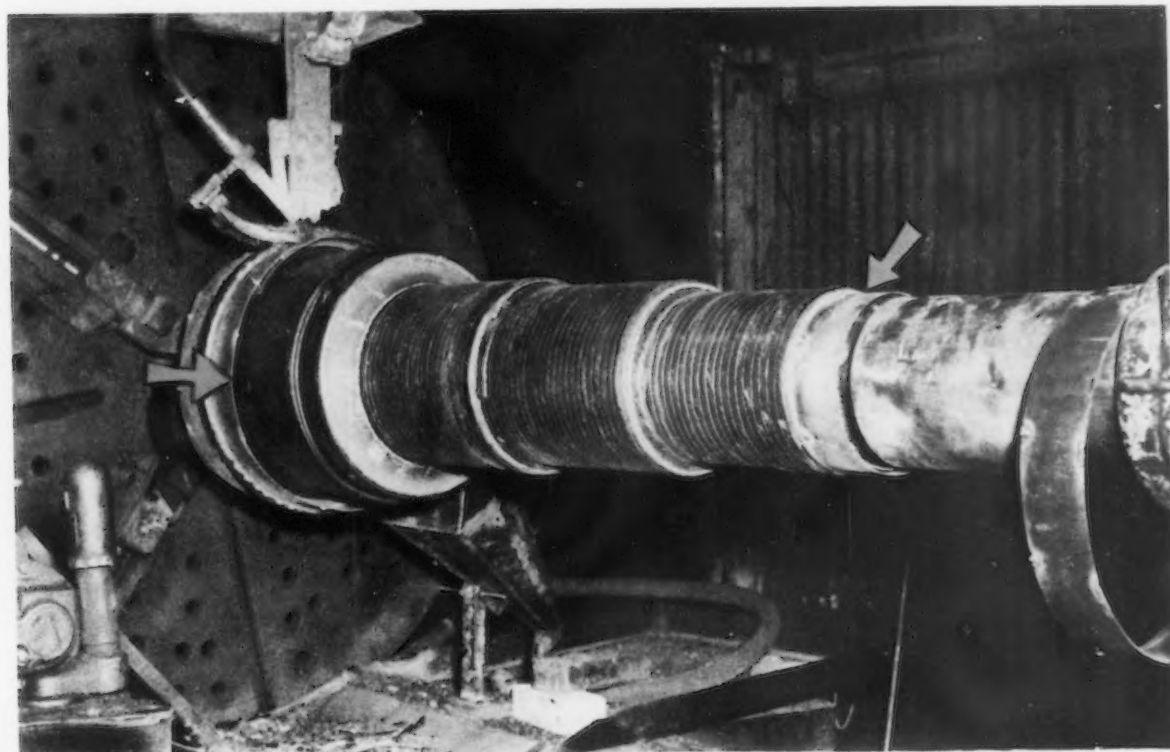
Asbestos braid is also used to support flux when welding near edges of a surface. This is the same eccentric shown in fig. 1.
